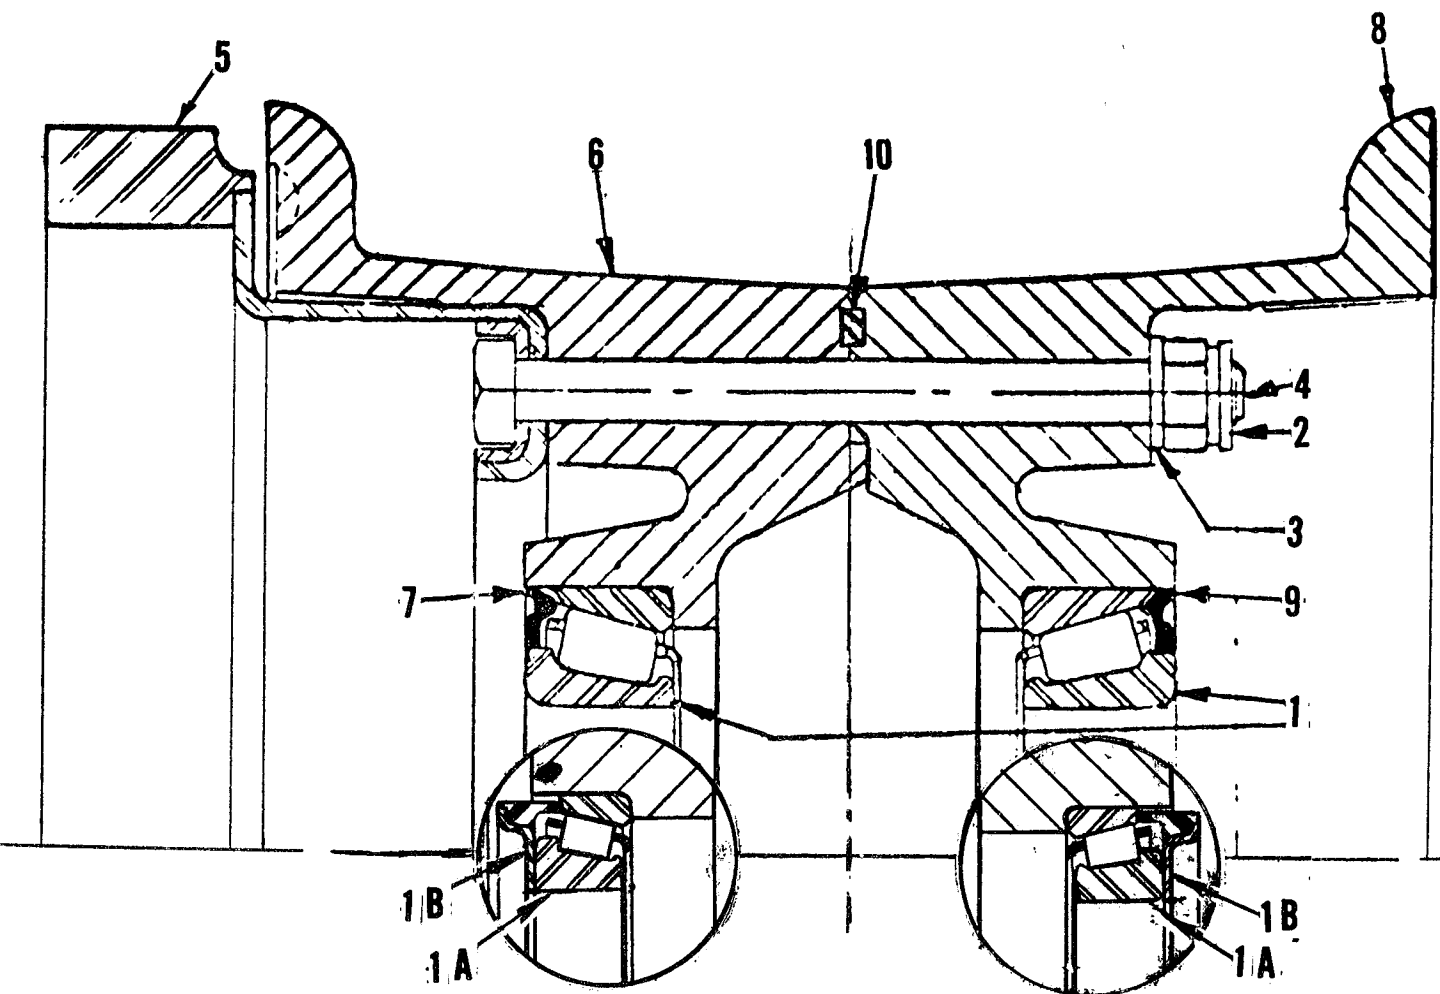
Main Wheel Assemblies 95-300001-1, 95-300001-73 and 95-300001-67
